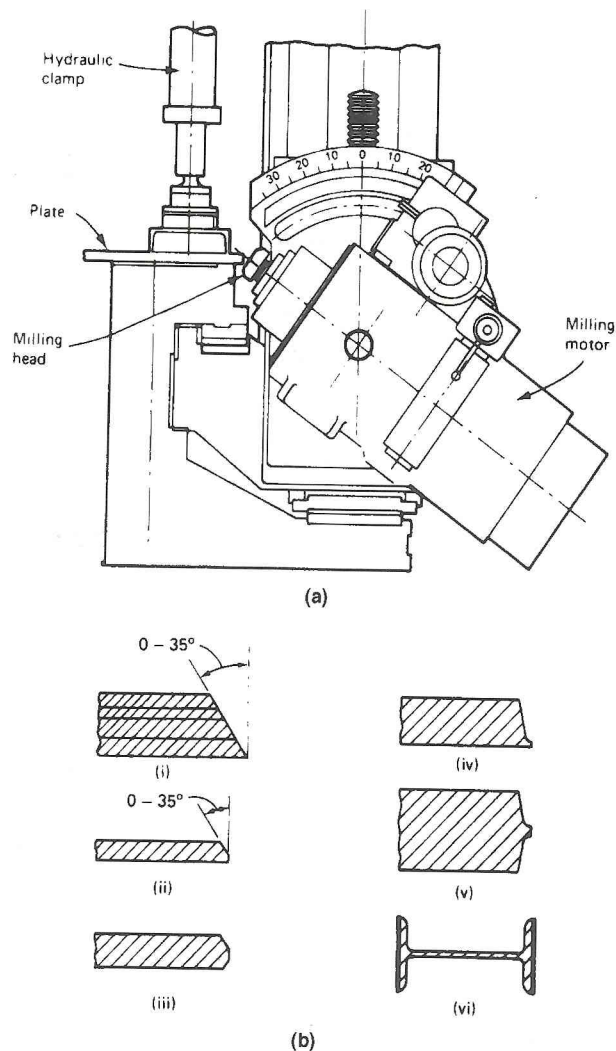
Mechanical edge planer: (a) assembly; (b) mechanically cut edge preparation—(i) single bevel without nose, suitable for batches of plates; (ii) single bevel with sheared nose 15 mm maximum or milled nose; (iii) double bevel and nose; (iv) single bevel with sheared nose 15 mm maximum or milled nose; (v) single bevel with sheared nose 15 mm maximum or milled nose; (vi) flanged edge.
